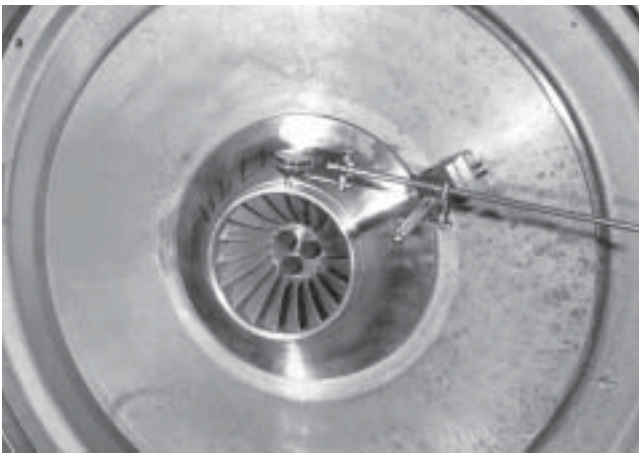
REMOVING IMPELLER (HF MODELS)
